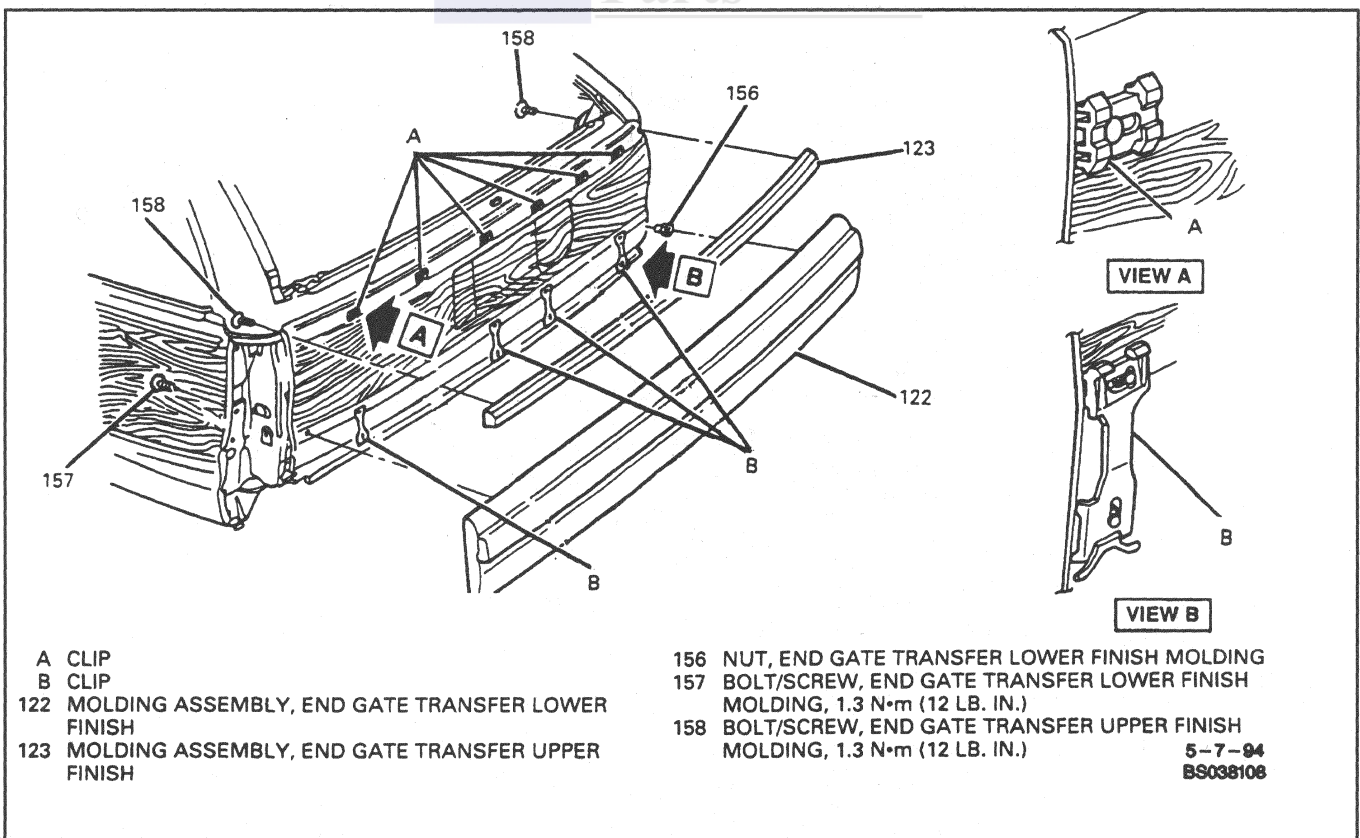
Transfer Upper and Lower Finish Moldings-(Buick)
